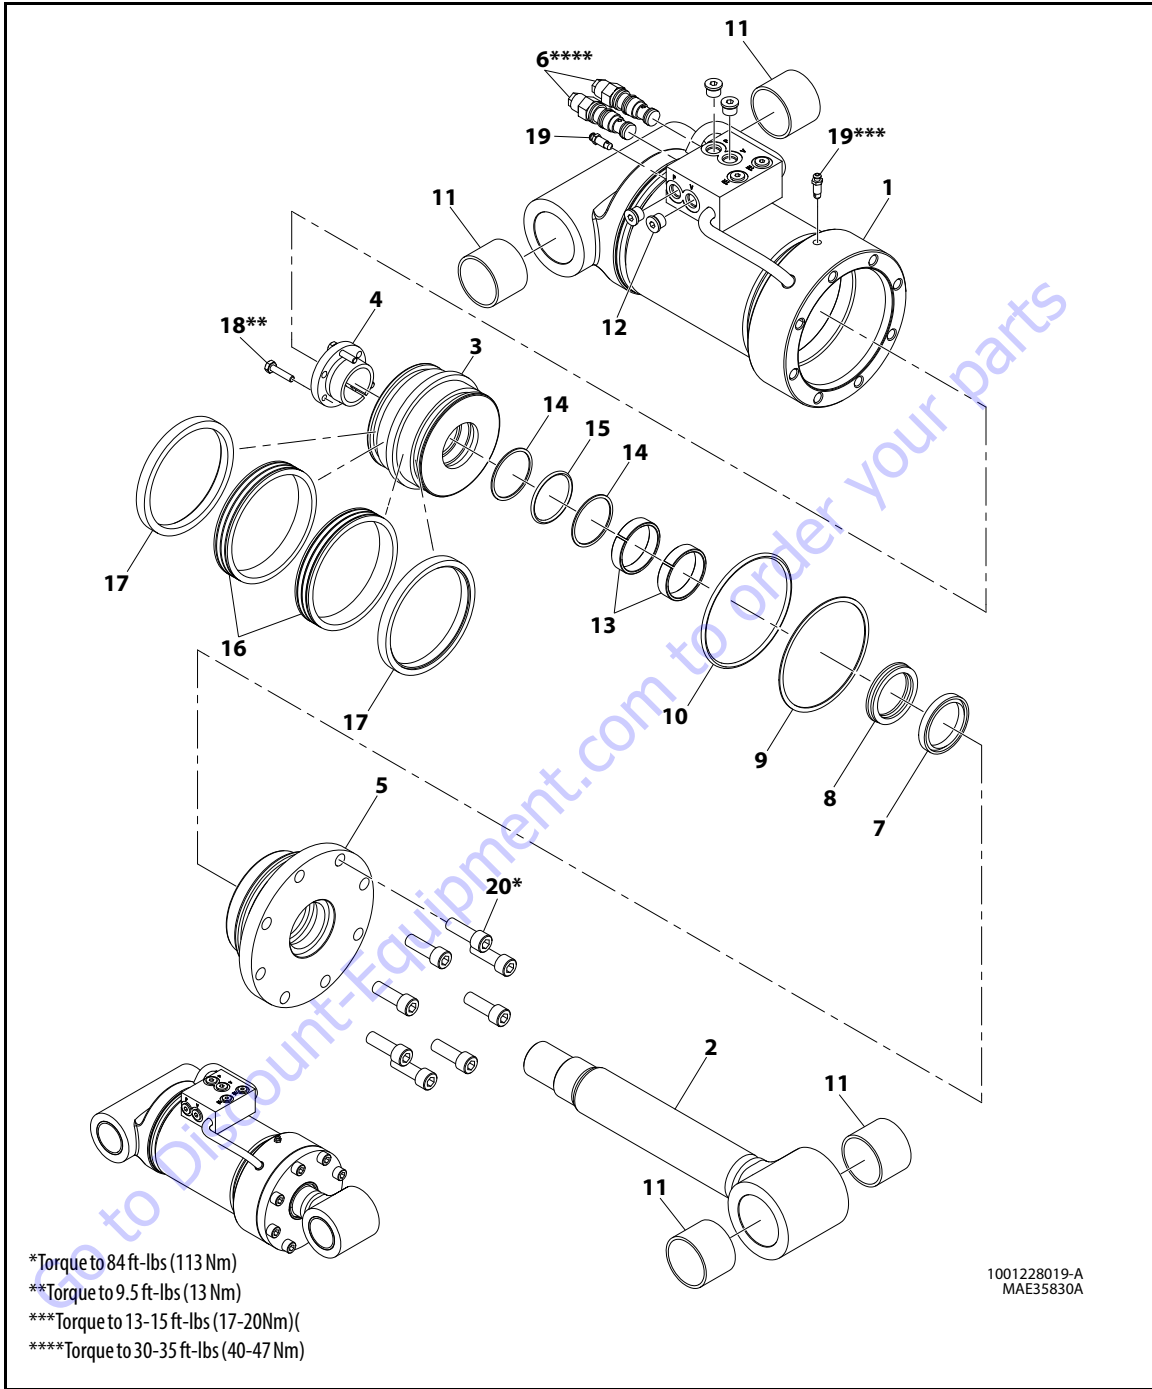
Axle Extension Cylinder (SN 0300196322 through 0300238565, SN B300002238 through B300002404, SN 0300238566 to Present, SN B300002405 to Present)
